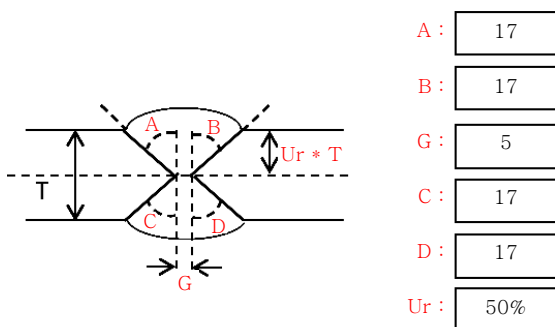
Geometry variables of the butt-groove weldment
